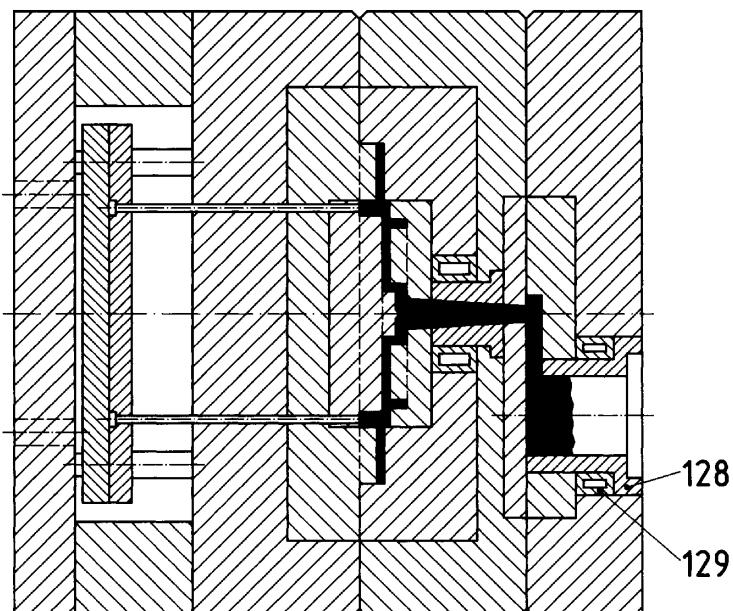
Diecasting die for cold-chamber diecasting machine with horizontal pouring sleeve, three-plate construction
